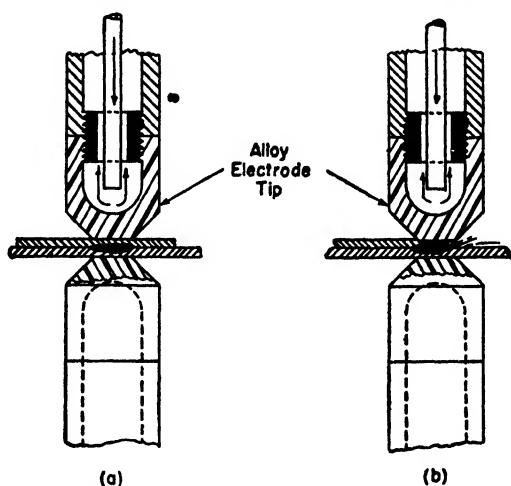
Typical assembly for spot welding showing two workpieces and two electrodes. (a) Correct assembly, soft metal is confined. (b) Wrong, electrode is too near edge of one piece.
